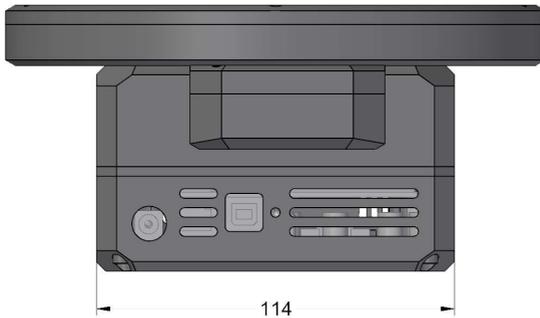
G2 camera head with External filter wheel bottom view dimensions
